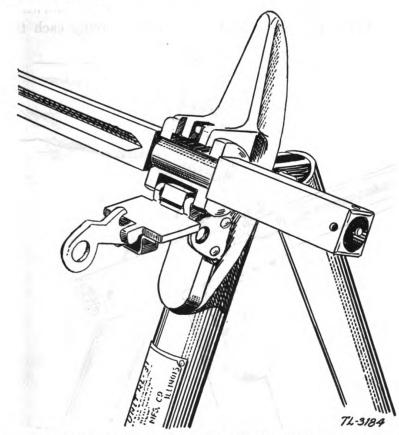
Close-up of one of the axle bearings of reel unit RL-31, with hinged bearing cap open and axle in place.
